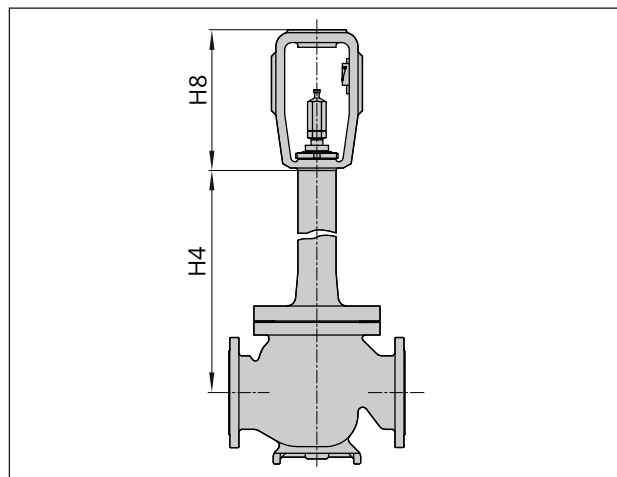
Type 3241 with insulating section or bellows seal, DN 200/NPS 8 and larger
